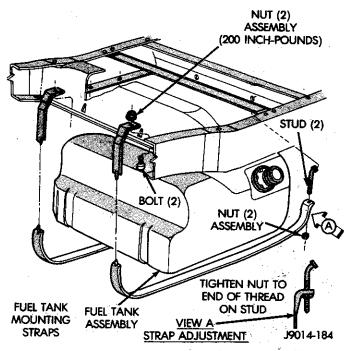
Ramcharger Fuel Tank Removal/Installation
